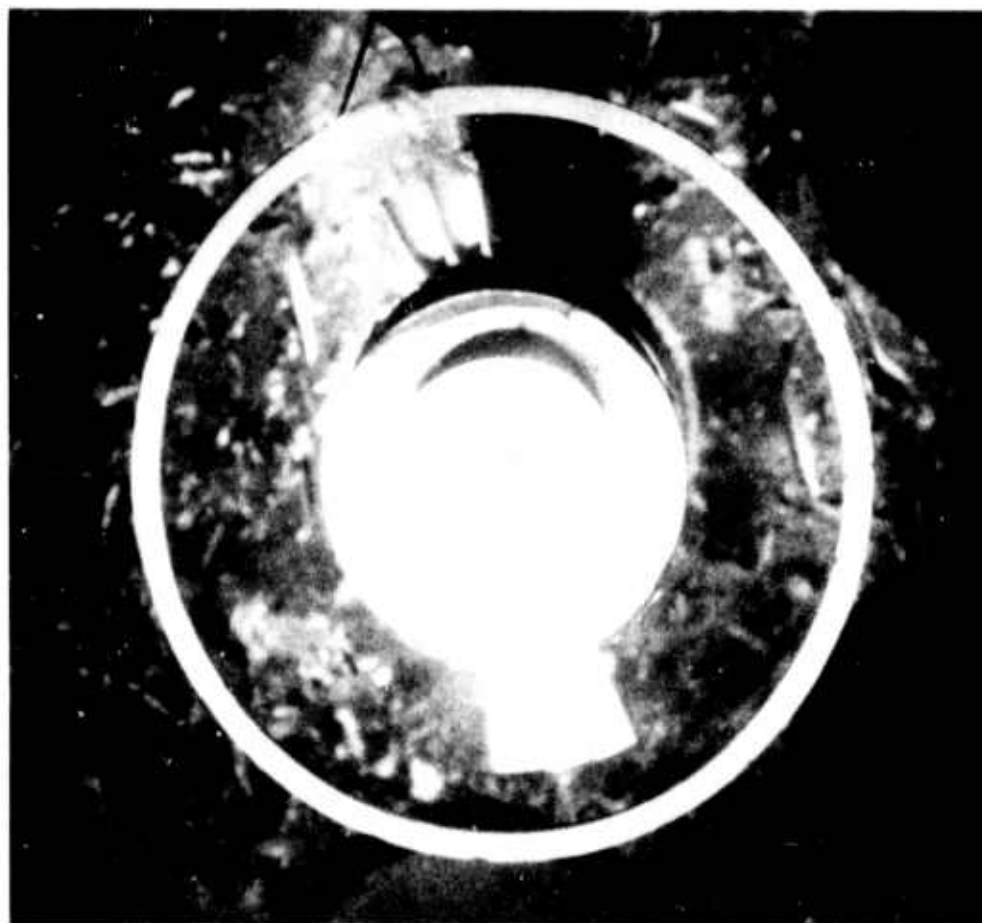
First Stage Rotor Blade Segments at Instant of Failure at 61,900 rpm
